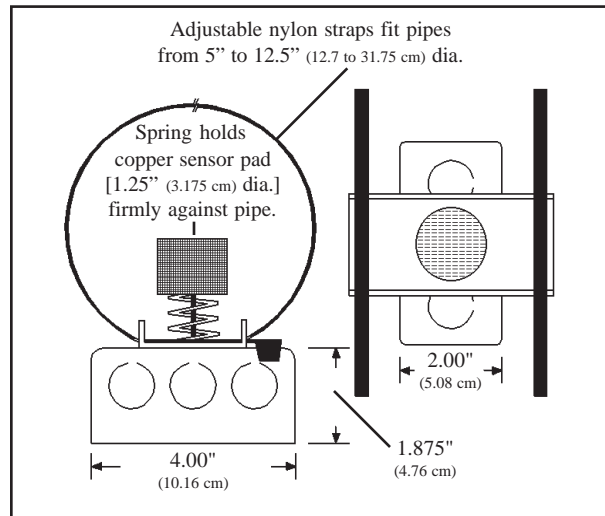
Spring-Loaded Unit (-STP) Dimensions
